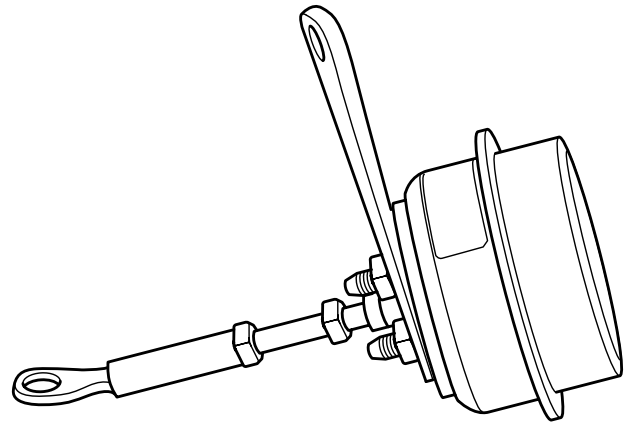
Wastegate actuator modified with a threaded rod and nuts to make it adjustable.
